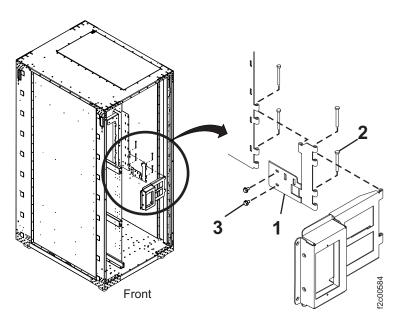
Earthquake resistance kit parts - Relocation bracket for the operator panel
